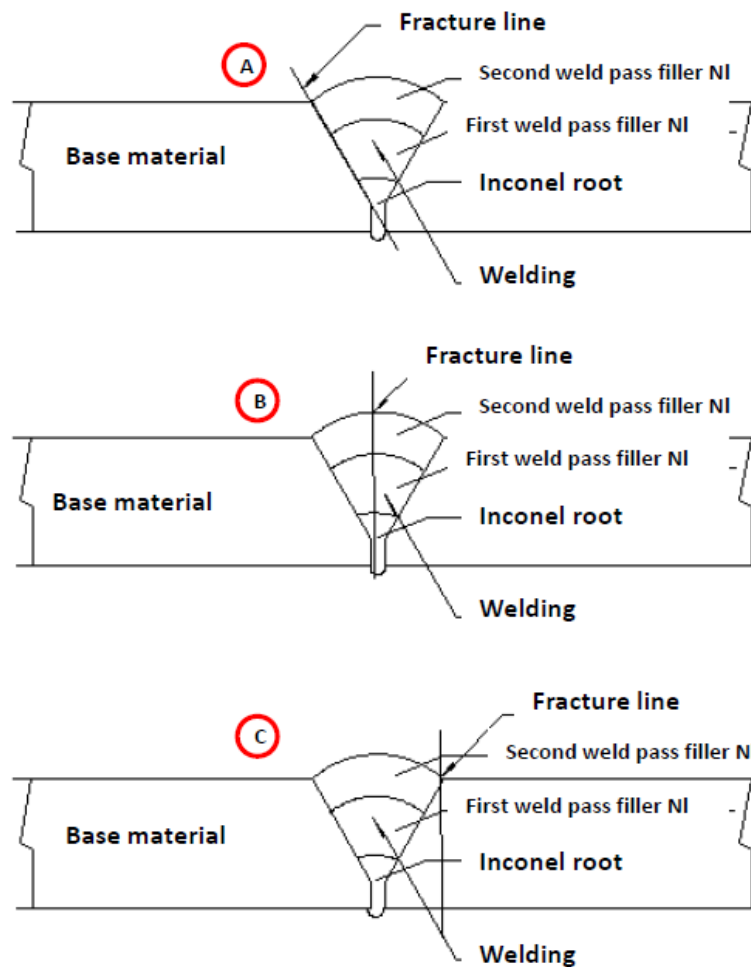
Zones of metallographic observation: (A) weld base metal base interface, (B) weld bead, (C) base metal.
